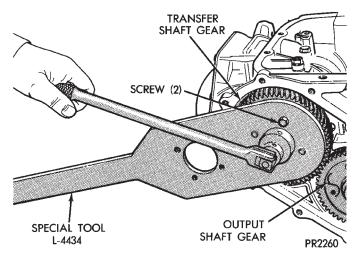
Remove Transfer Shaft Gear Retaining Nut
